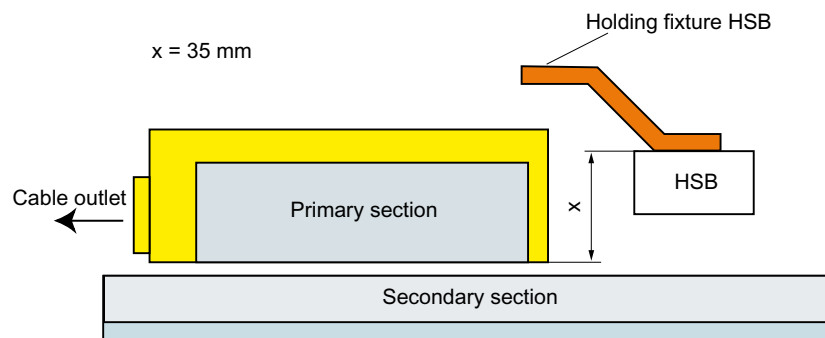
Specified dimension for mounting the Hall sensor box (HSB)
